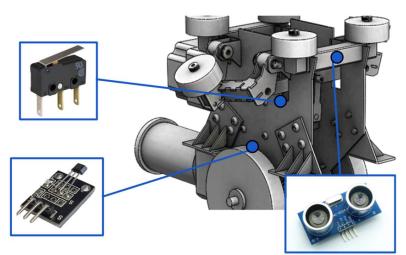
A picture representation of where the sensors will be placed on the bogie.
